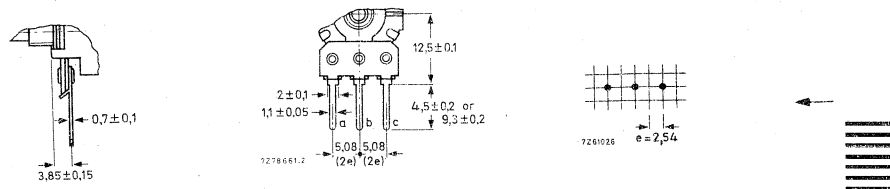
Long or short printed-wiring pins (single potentiometer).
